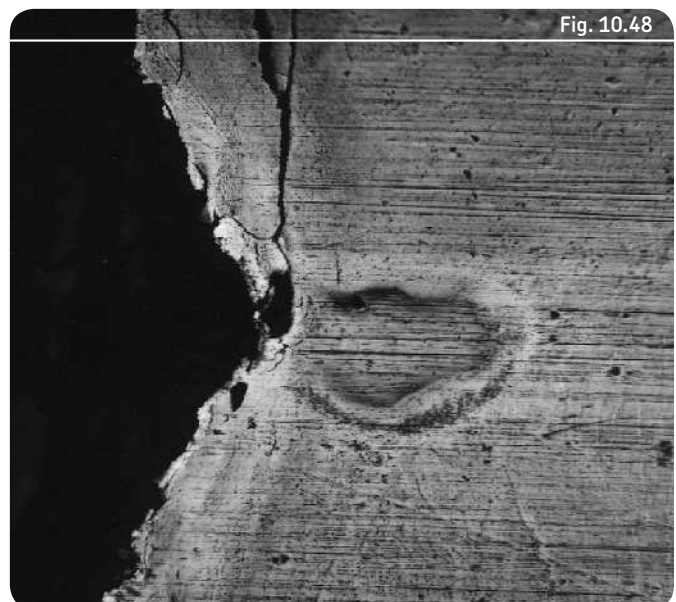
clearly shows the consequences of indentation on a spherical roller bearing inner ring. The over-rolling direction is from right to left. A rather large and soft contaminant was trapped in a raceway and over-rolled. At the bottom of the dent, grinding lines are still visible. Also notice the raised rim, partly polished away, around the dent. To the left, behind the dent, there is a large black coloured spall where material has been detached. There are also some cracks where material is about to be detached.
